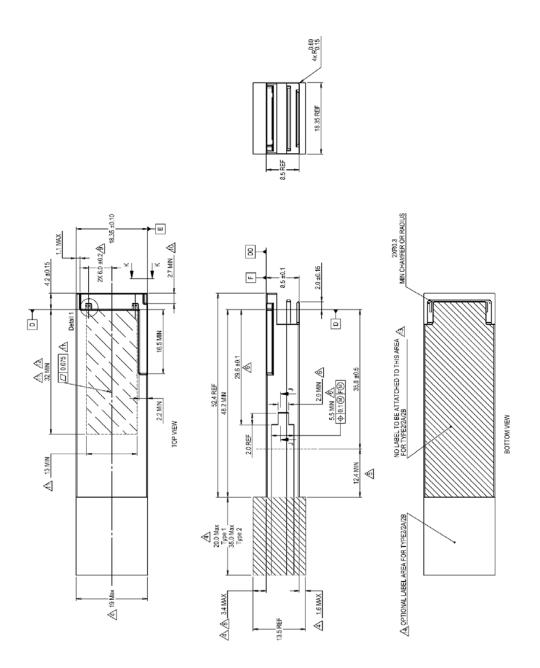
FTCD4538E1PCM Mechanical Dimensions Part 1
